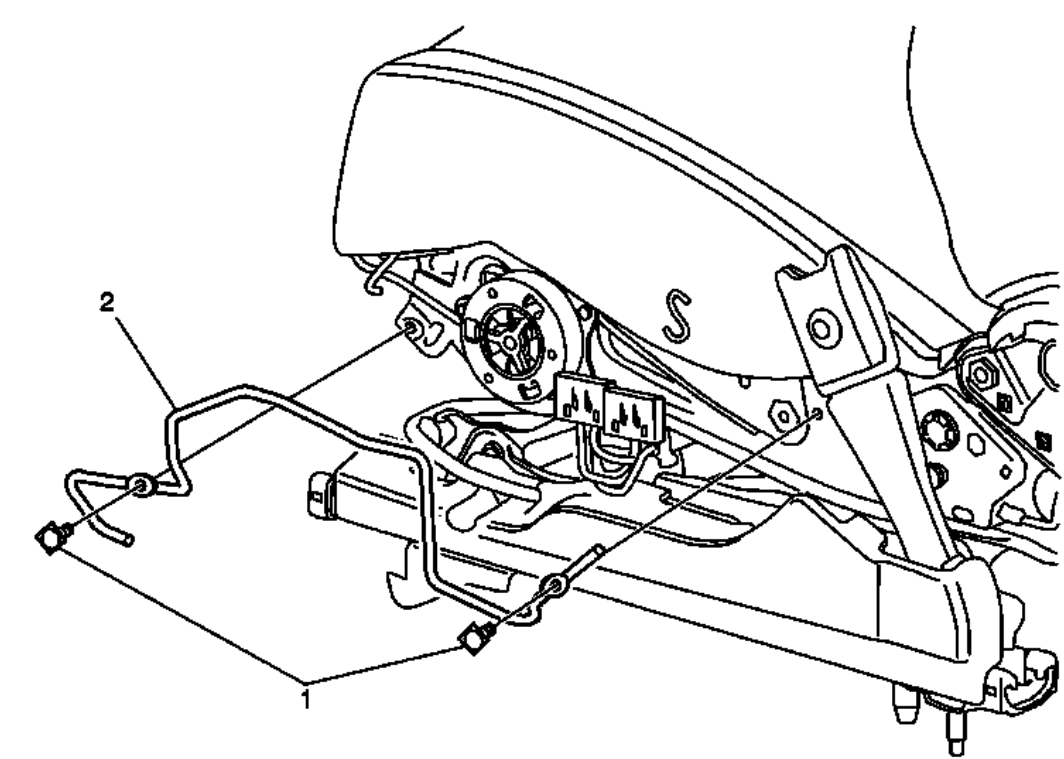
Driver or Passenger Seat Adjuster Finish Cover Retainer
